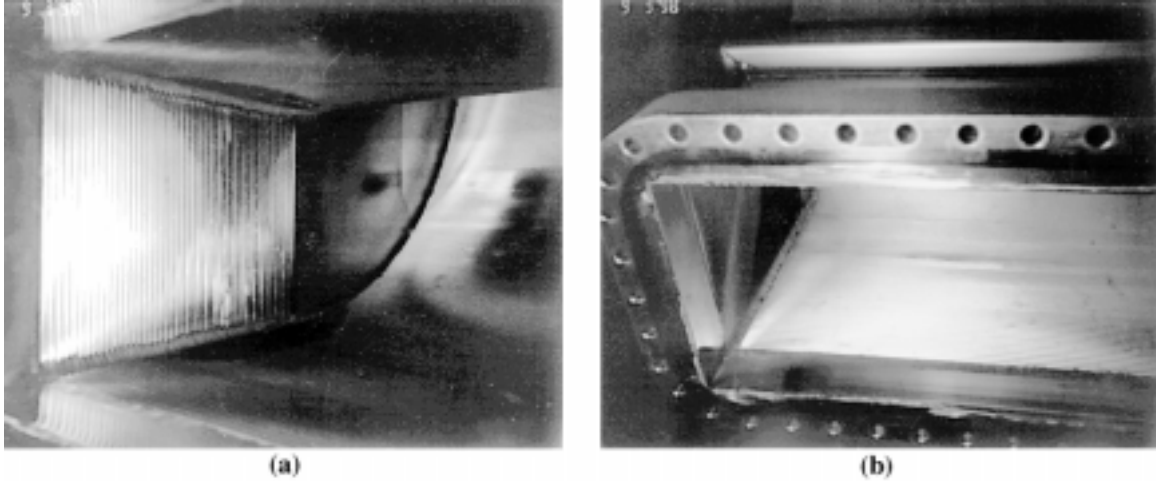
Two views of the grooved inner surface of the test waveguide elbow.
